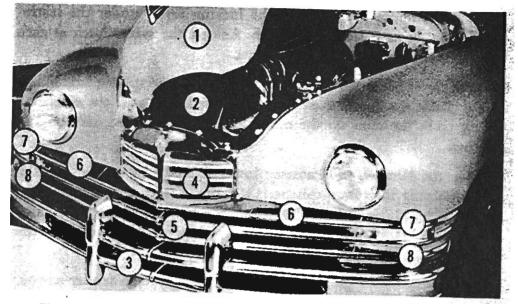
To Remove a Left Front Fender, the Parts Indicated Should Be Removed.
